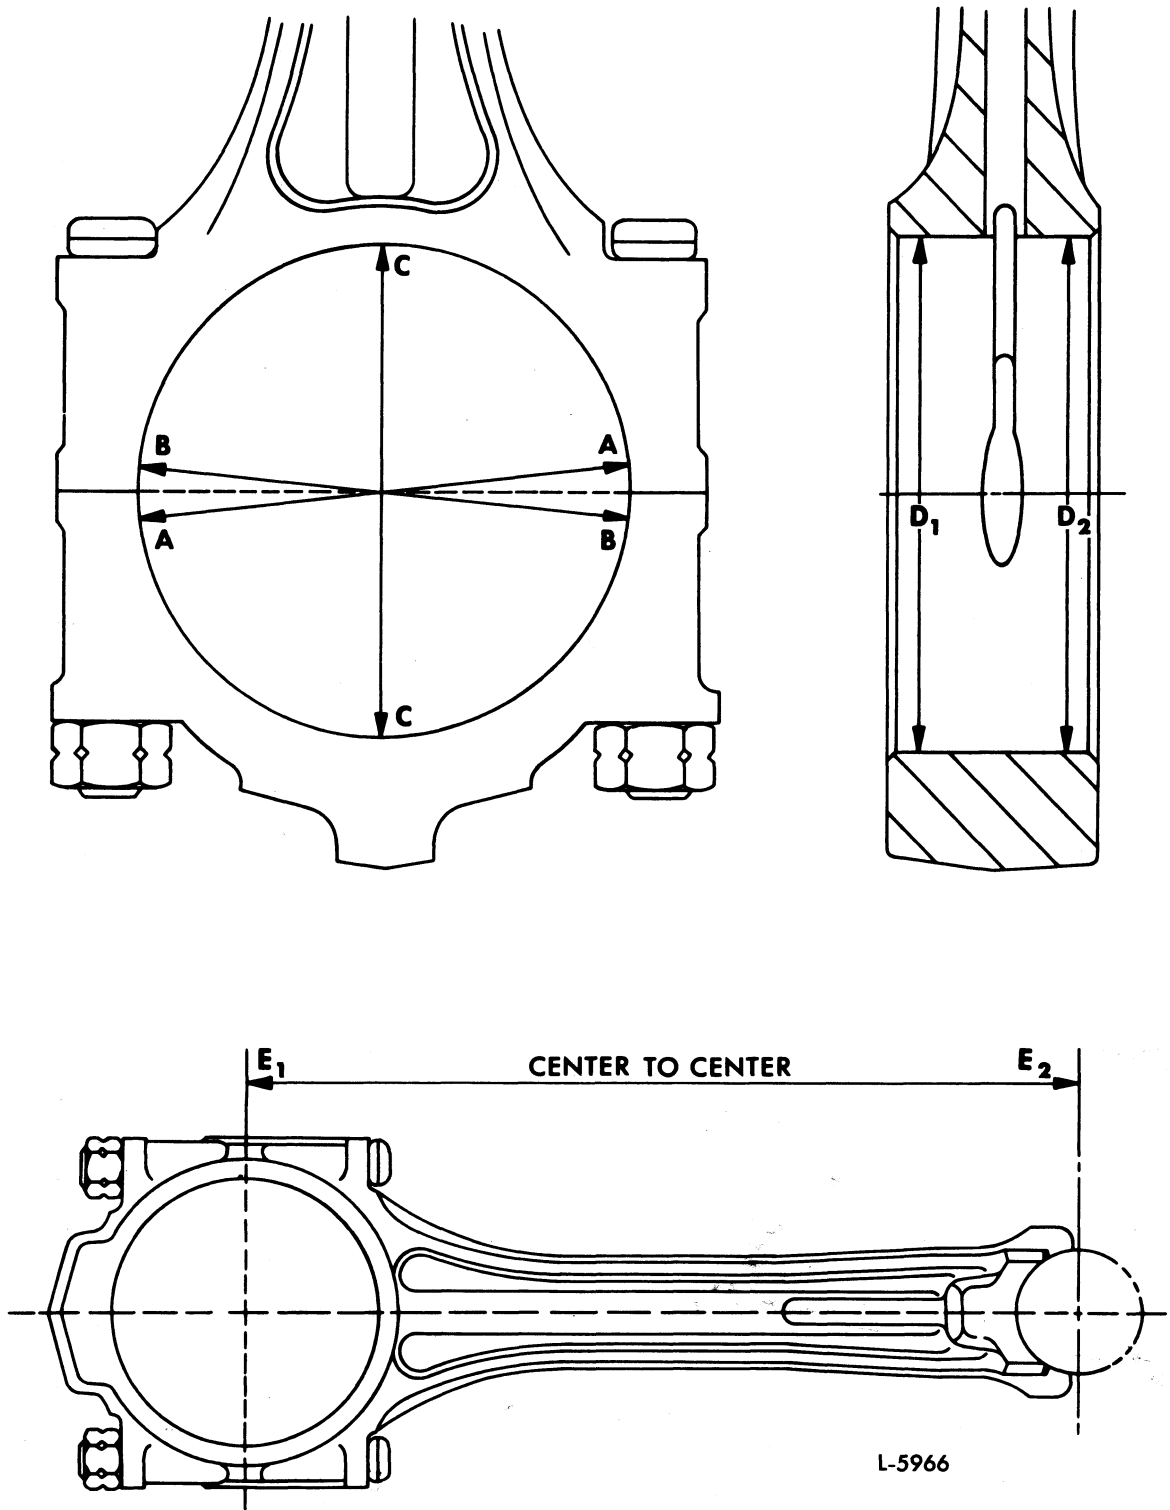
Dimensional Inspection of Cross-Head Piston Connecting Rods
